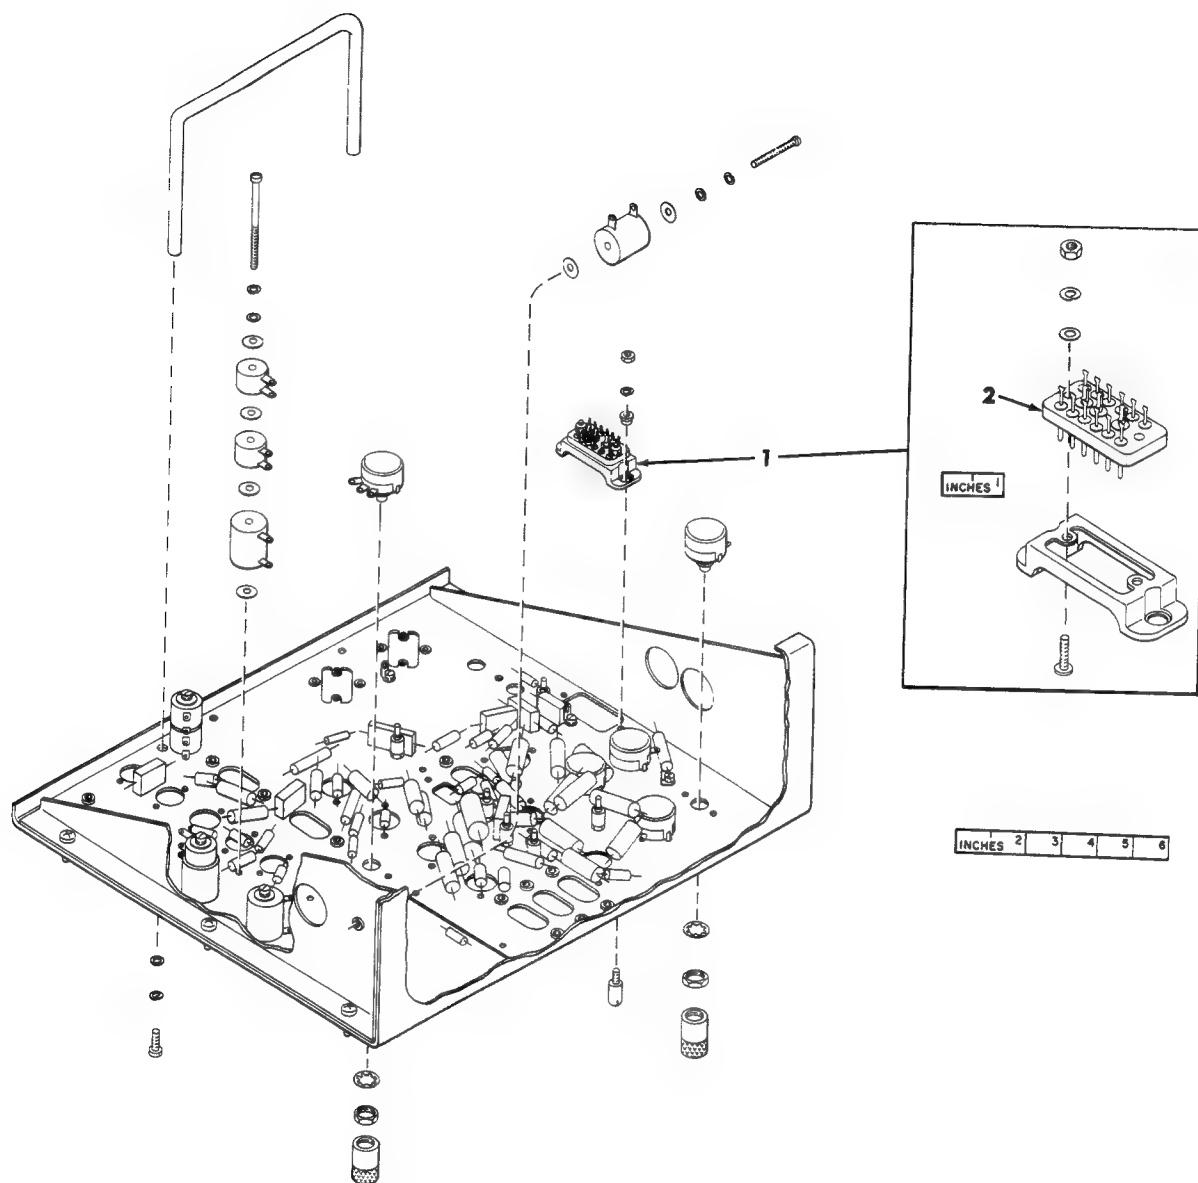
Oscilloscope OS-49/M (8007722)—partial exploded view
